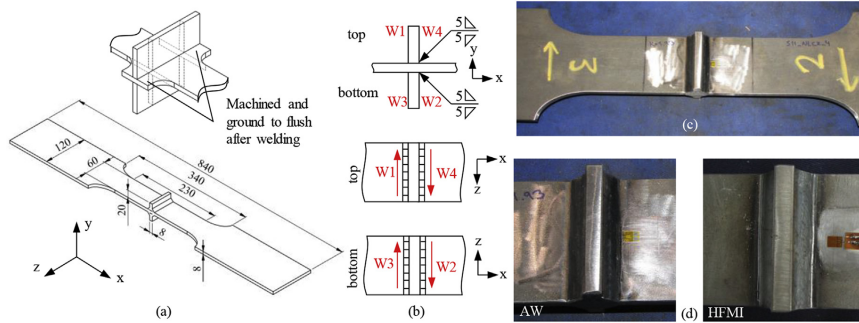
NLCX fatigue test specimens tested within this study: (a) shape and dimensions of the test specimens (all dimensions in mm), (b) sequence and direction of weld passes (W1–W4), (c) example of welded specimen, and (d) detailed views on joint areas and strain gages in specimens in the AW and HFMI-treated condition.
